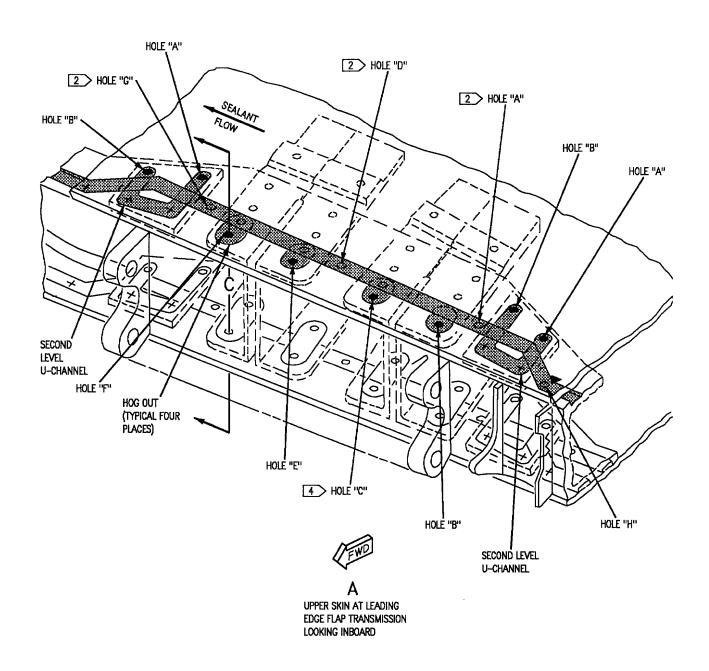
Upper Skin Channel Groove Seal Injection (Sheet 3)
